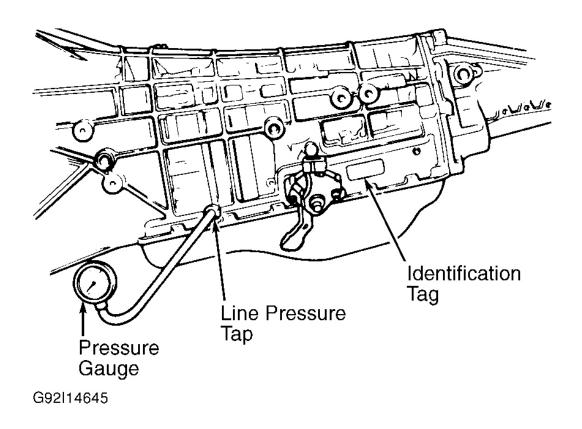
Testing With Pressure Gauge Courtesy of FORD MOTOR CO.
